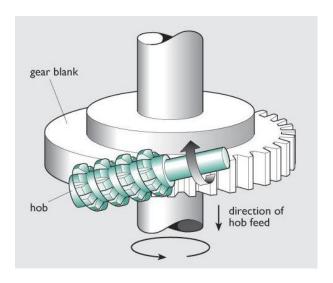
Hobbed and Milled Teeth Manufacturing
